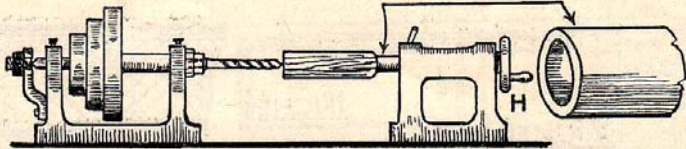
MANDREL OF LATHE FITTED WITH MACHINE TWIST BIT.
